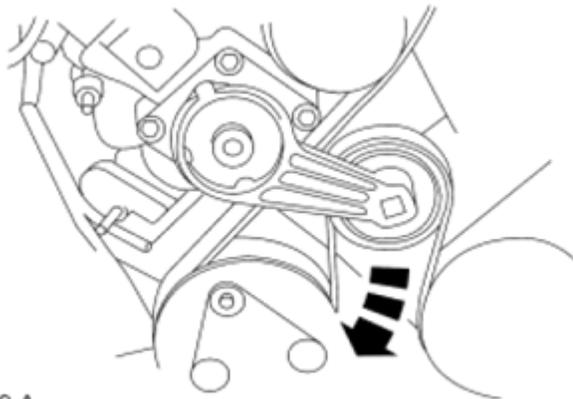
Rotating Tensioner Clockwise To Drive Belt
